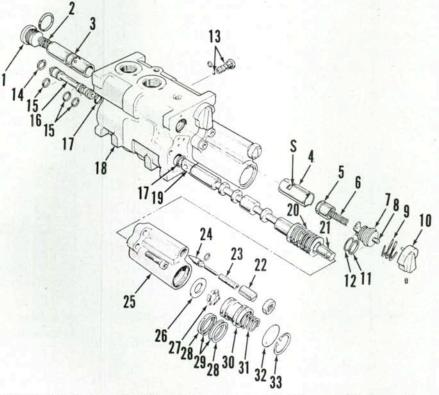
Exploded view of double spool remote control valve assembly used on tractors built in April 1985 and after. Flow restrictor (4) must be installed with slot (S) positioned downward.
